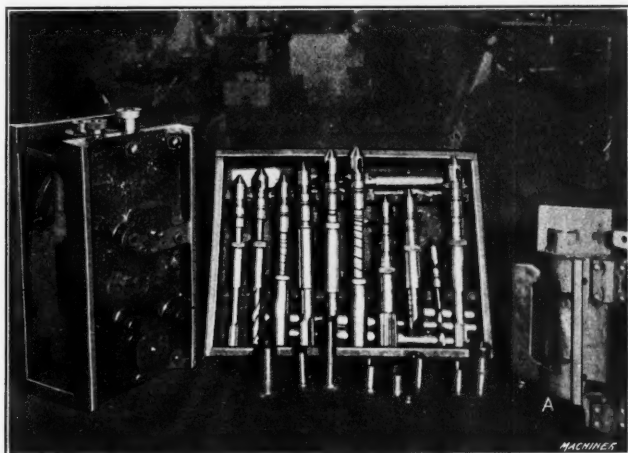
Jig and Tools used in machining Quick-change Gear-box for Greaves-Klusman Engine Lathes
